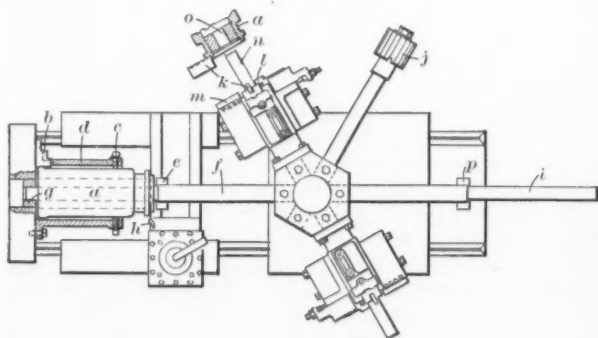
The Setting for the First Operation of Finishing Gas Engine Cylinders in a Gisholt Turret Lathe.
